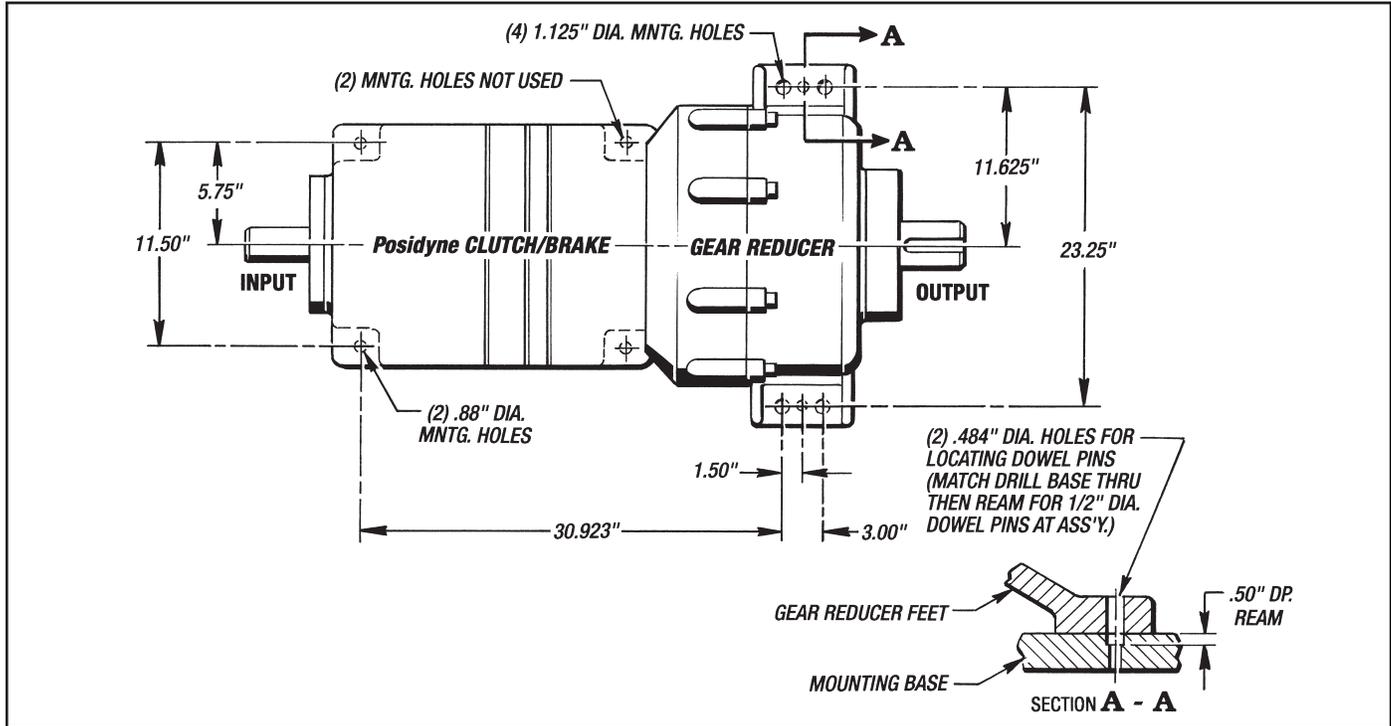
Mounting Hole Layout and Installing Mounting Dowel Pins
